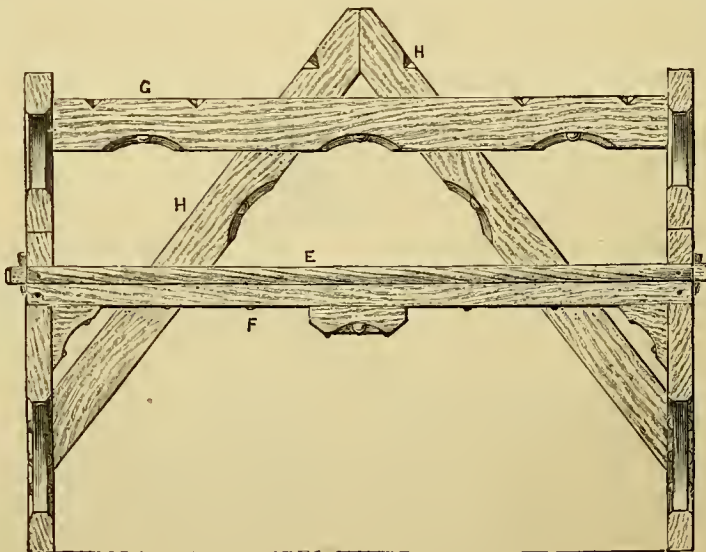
HALL SEAT OR SETTLE—FRONT ELEVATION.
